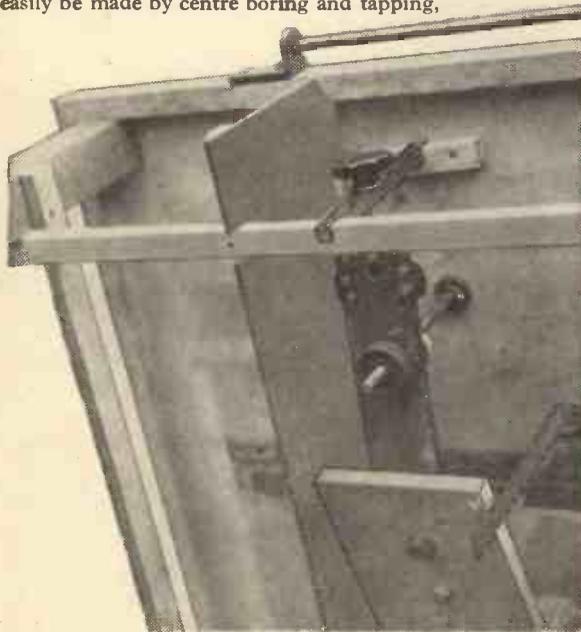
(Left).—An underside view of the saw table showing particularly the adjustment mechanism.
